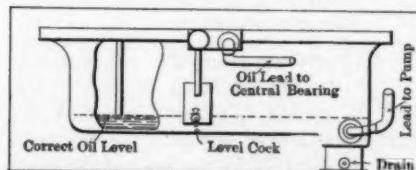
The crankcase of the S. G. V. car, illustrating the oil well in the rear end to provide suction for the pump.
